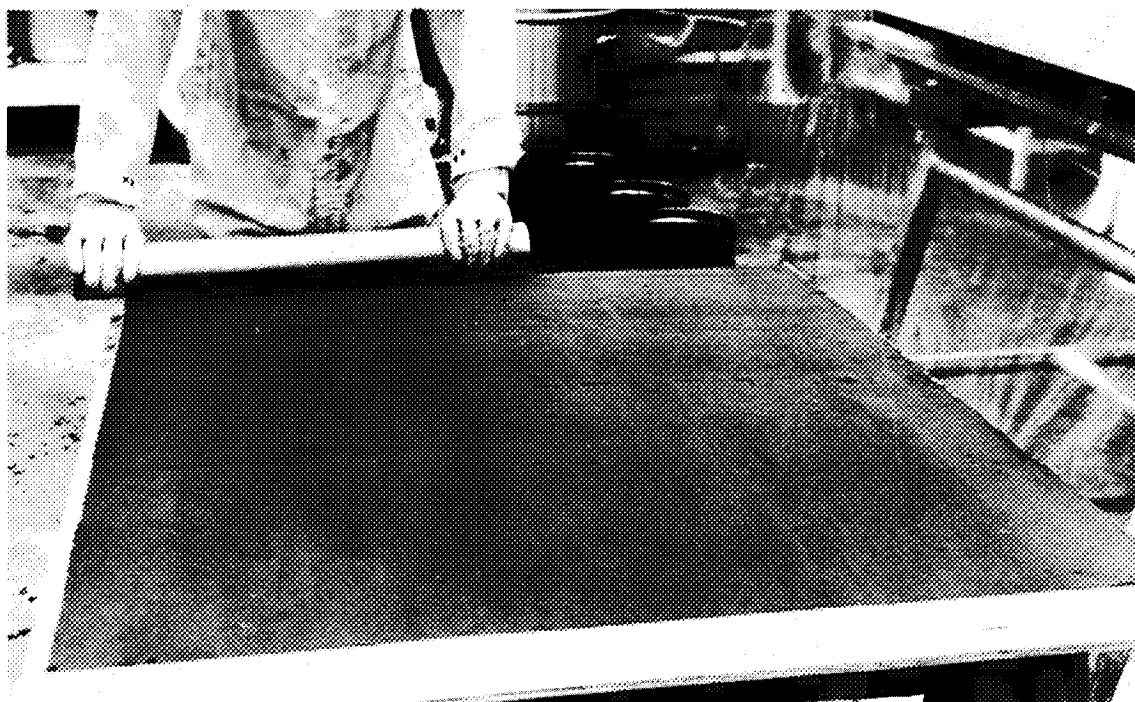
shows a typical 51 by 178 by 2.54-centimeter (20 by 70 by 1-inch) heat shield after removal from the vacuum bag and prior to trimming operations. The amount of warpage shown was surprisingly small, considering the span. The table on which the heat shield was placed was not flat and the amount of warpage shown is exaggerated. The most severe warpage occurred at the ends and extended inward (along the 178-centimeter (70-inch) dimension) to about 20.32 centimeter (8 inches). The average height of the warpage at the ends was approximately 1.02-centimeter (0.400 inch). Final trimming of the burden from the surface reduced this warpage in varying amounts, in some cases by more than one-half.
